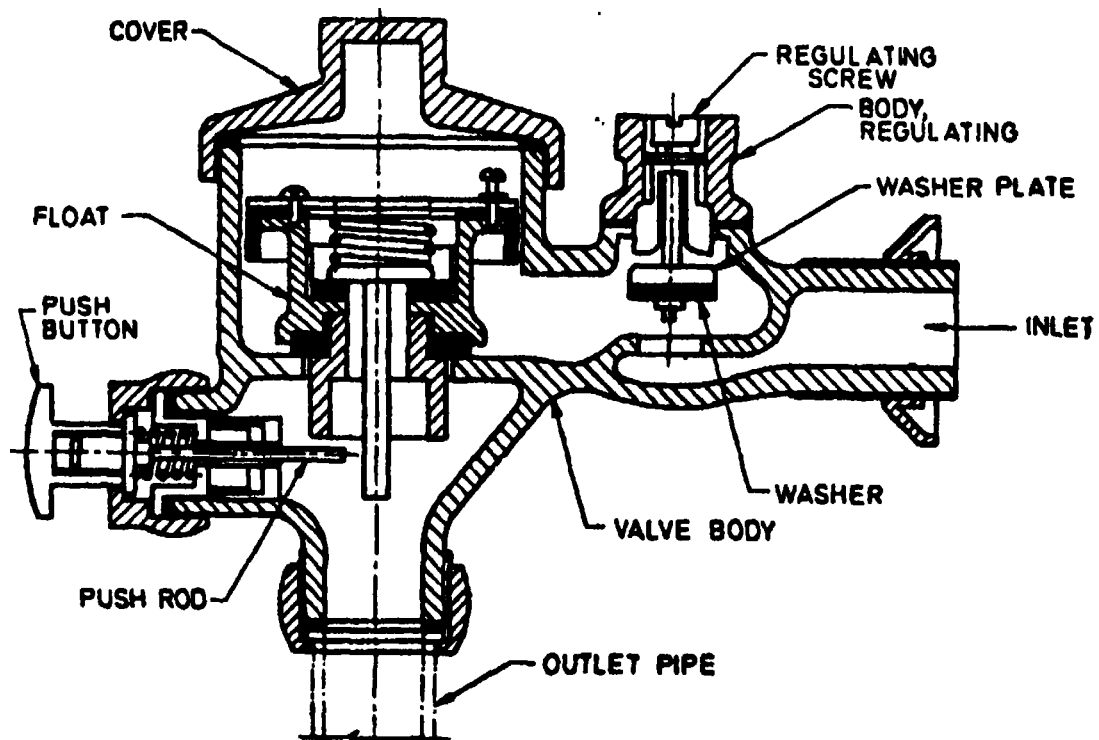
TYPICAL SKETCH OF A FLUSH VALVE
